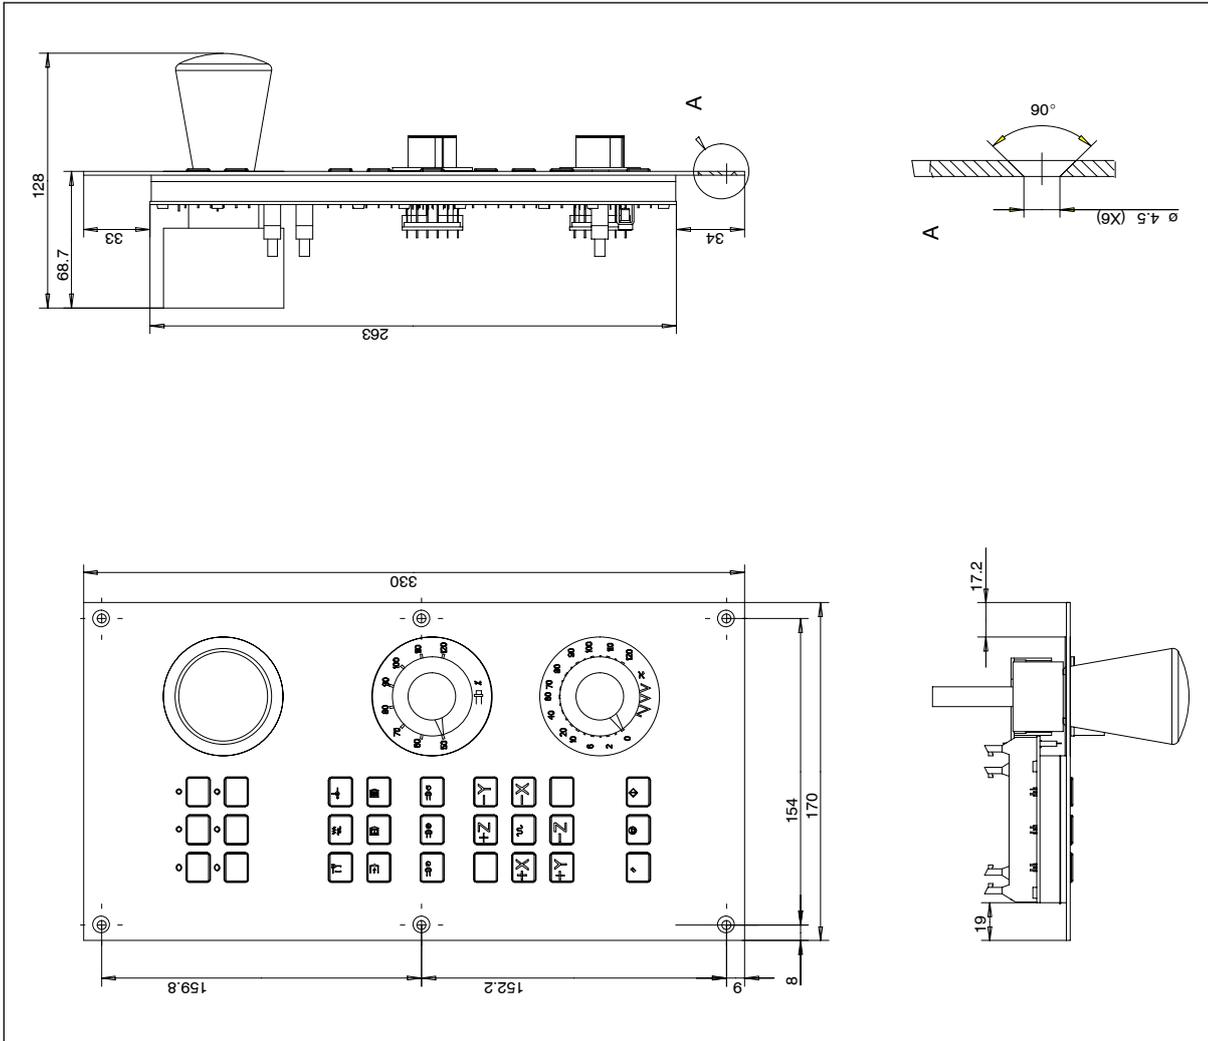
Mounting dimensions for the machine control panel (MCP)
